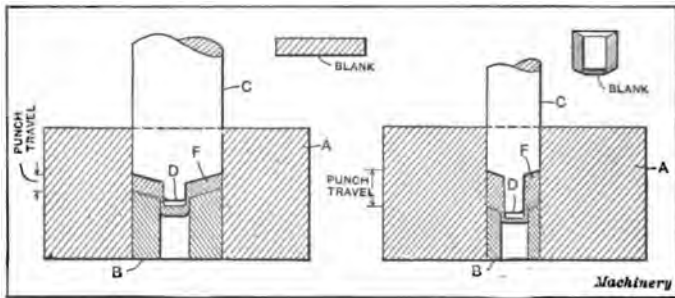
Extruding from a Flat Blank Fig. 31. Extruding from a Cup-shaped Blank
